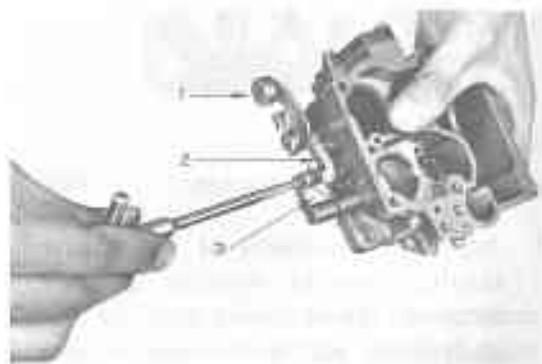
Shaft Arm &amp; Stopper Lever Assembly
